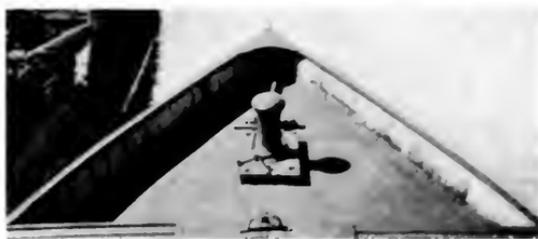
View of Forward Deck showing Irregular Shapes of Plating and Electrically Welded Seams
